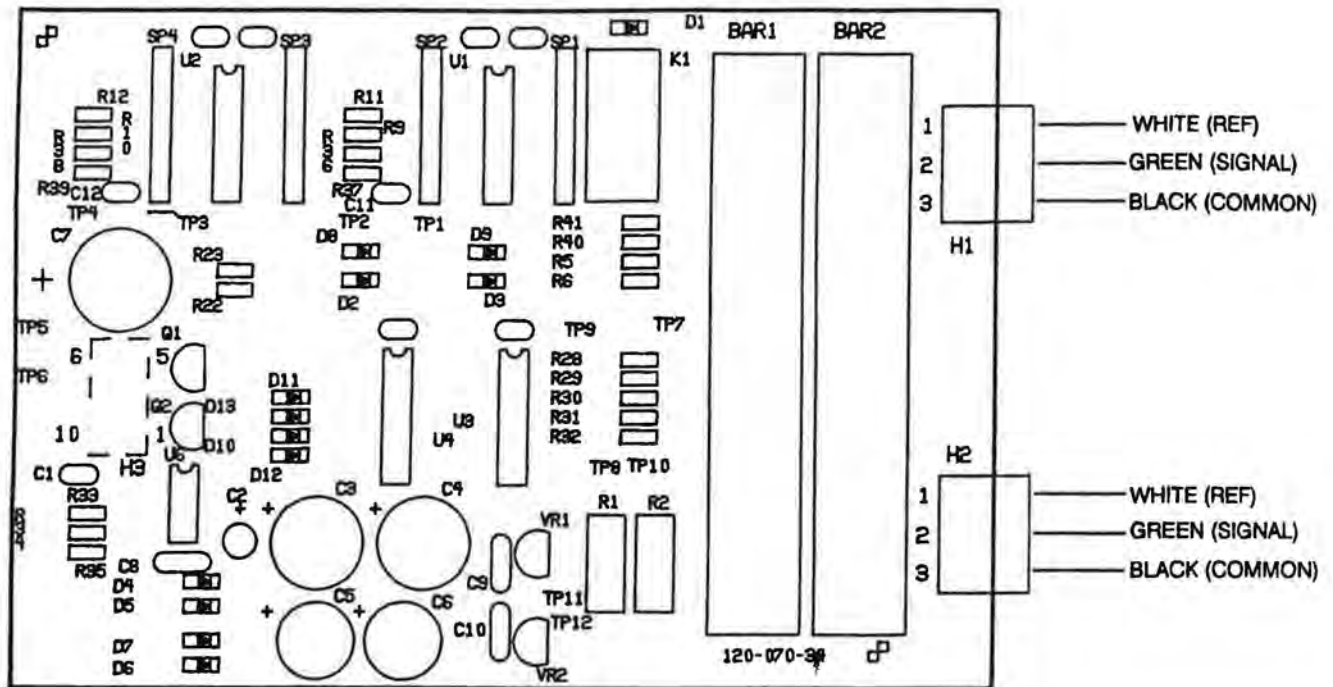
LIQUID SENSOR (THERMISTOR) INTERFACE BOARD P/N Q439933
